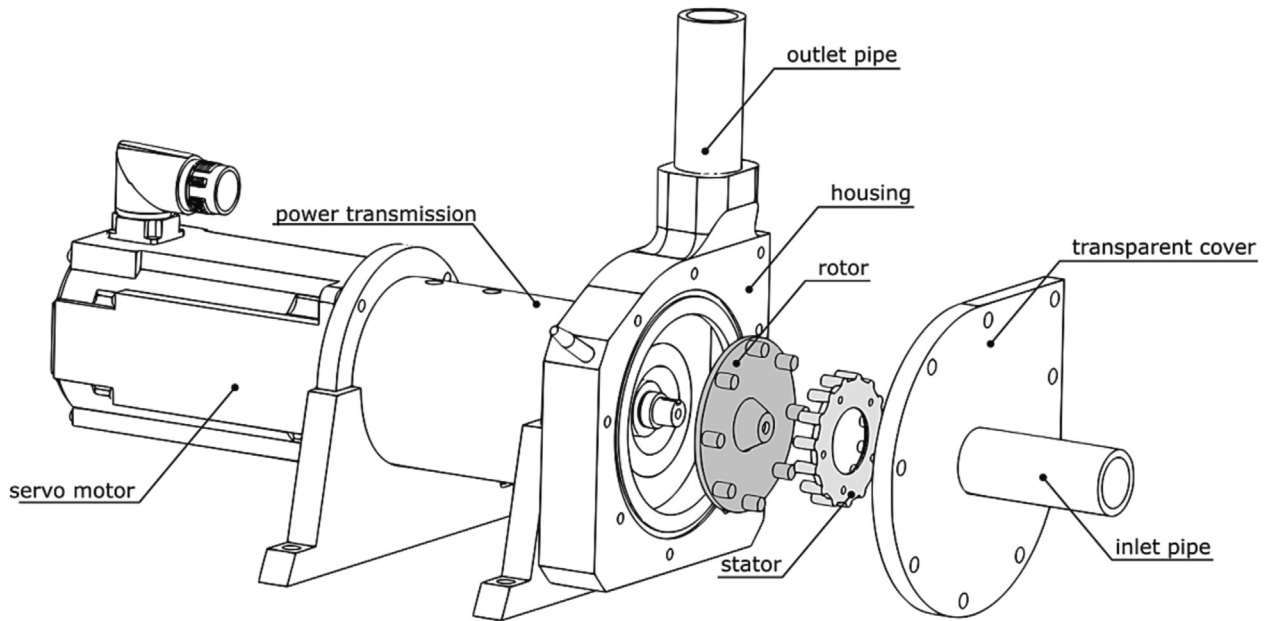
Exploded view of the newly designed and built RGHC with accompanying power transmission and servo motor.
